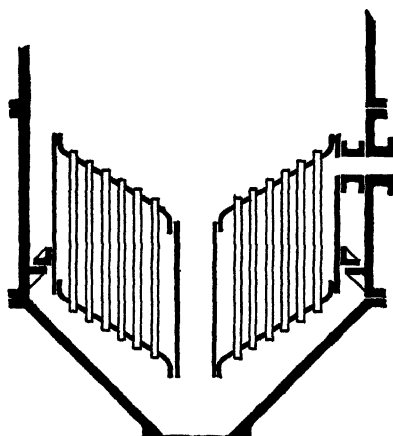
Basket type with inclined tube sheets ("Express" pan).
